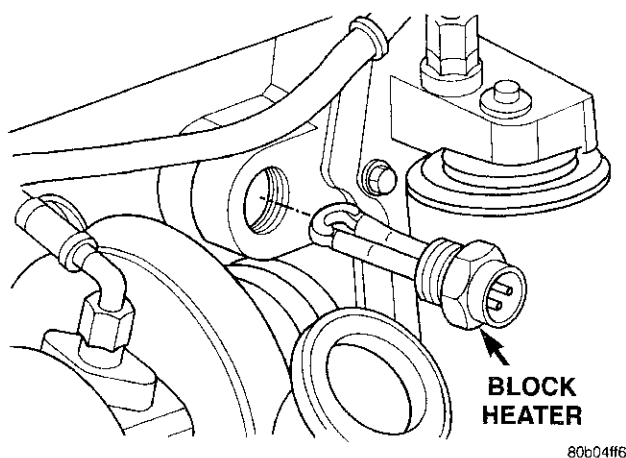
Engine Block Heater—5.9L Diesel Engine
